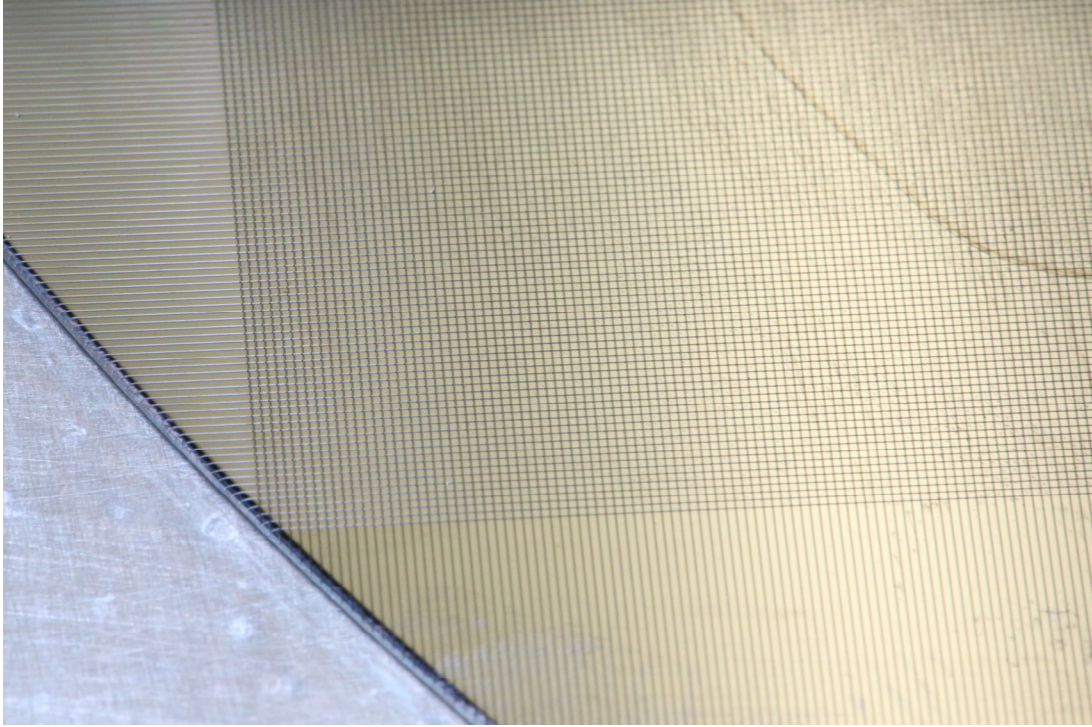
The first full test grid, demonstrating the successful operation of the fixturing and saw for cutting square features.
